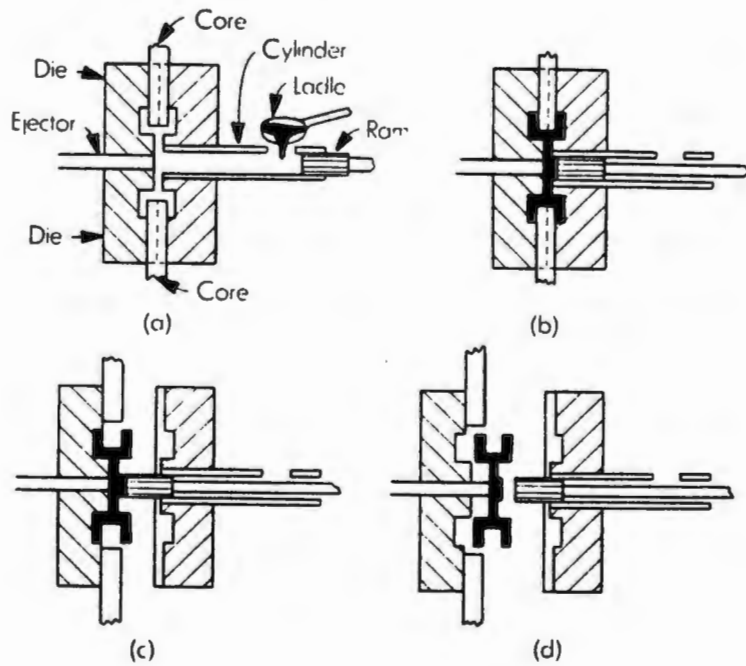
Cold-Chamber Die Casting Machine Sequence of Operations: (a) Cylinder is Filled with Molten Metal; (b) Ram Forces Metal into Die; (c) Die is Opened; (d) Casting is Ejected (Reprinted from [13])
